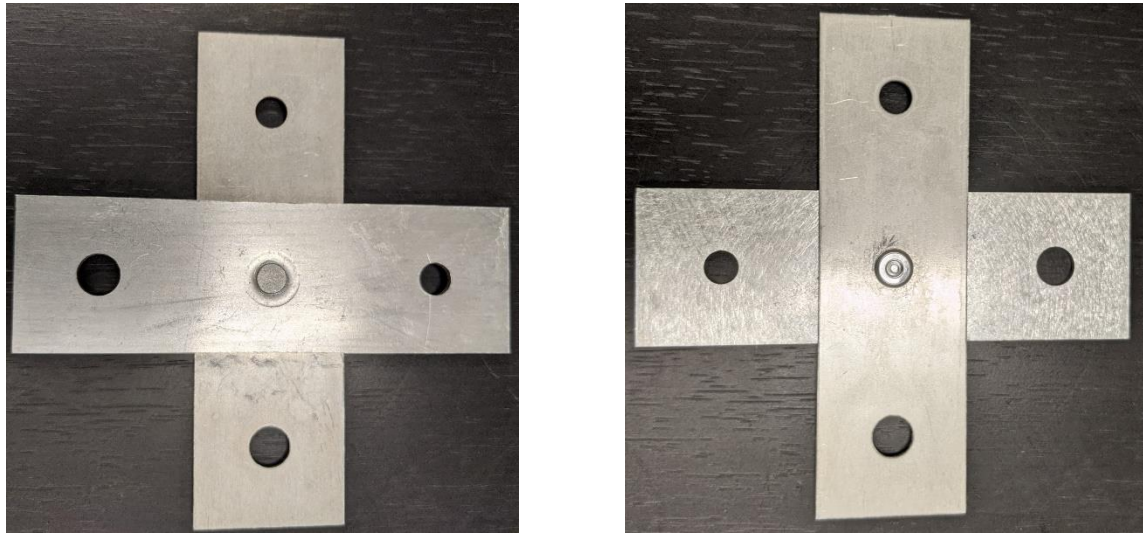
As received Al 6016 2mm by 1mm SPR cross-tension specimens showing SPR head and pierced 2mm pierced sheet (left) and 1mm clenched sheet (right)
